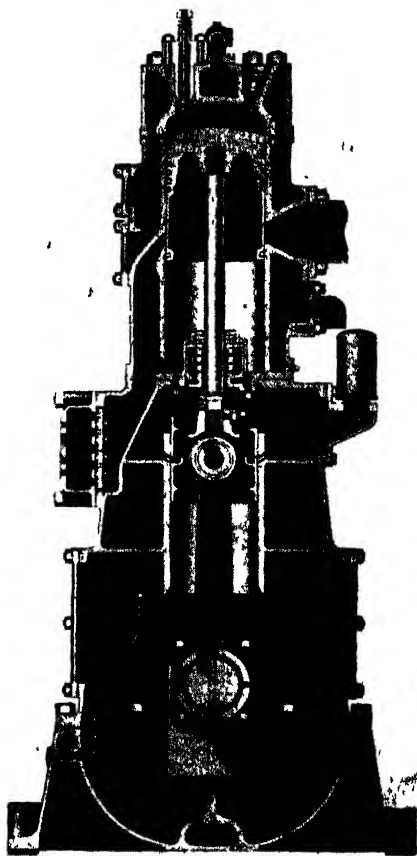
Superior two-cycle Diesel employs lower end of the cylinder for the scavenging-air pump.
